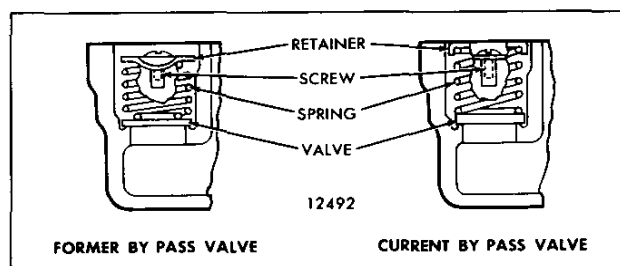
Bypass Valve Assembly Secured by Retainer and Screw
